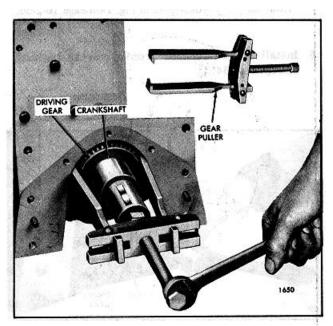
Removing Oil Pump Driving Gear from Crankshaft.
